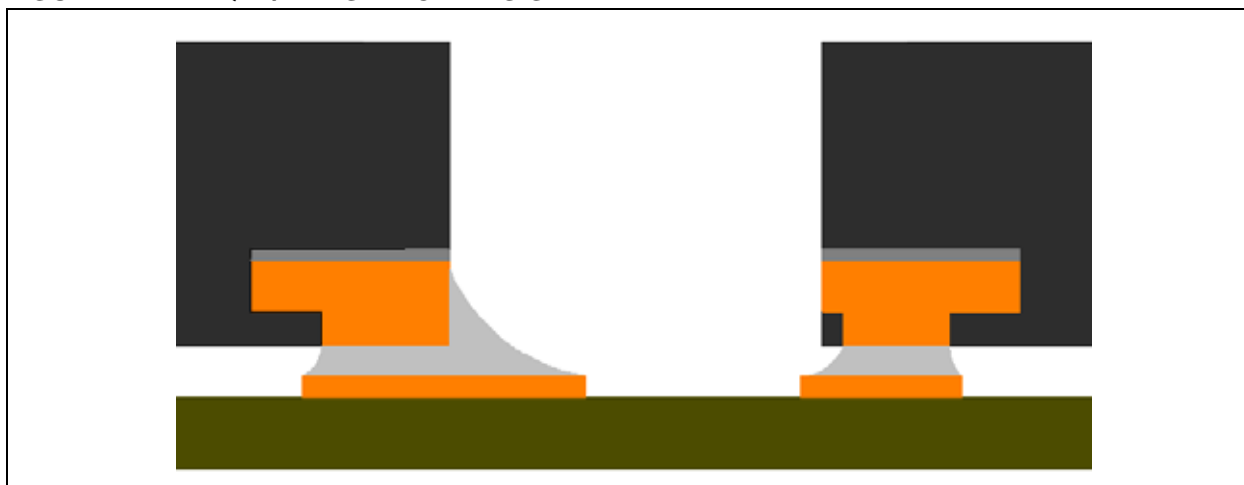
TYPICAL QFN PCB LAND PATTERN
